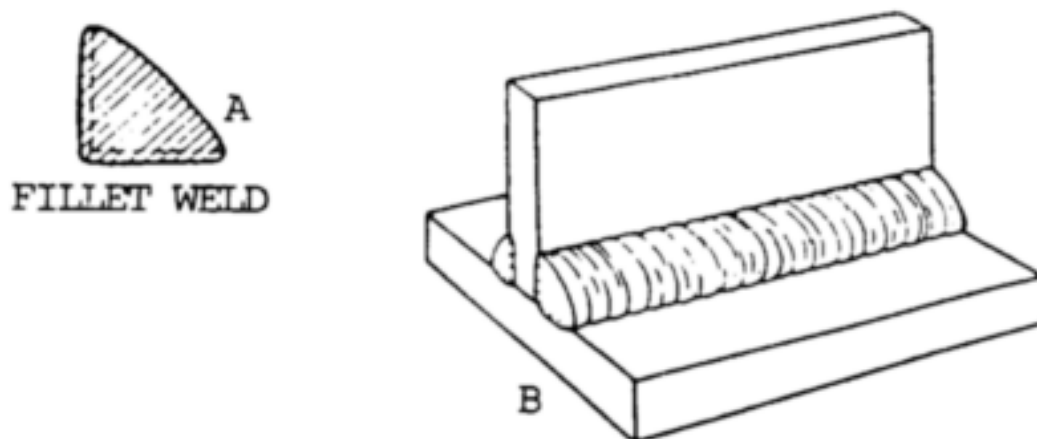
Tee joint - single pass fillet weld.
